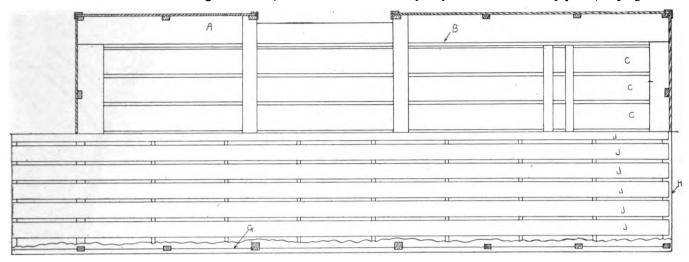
SHOWING HALF PLANS OF BOTTOM AND TOP OF MILE WAGON
